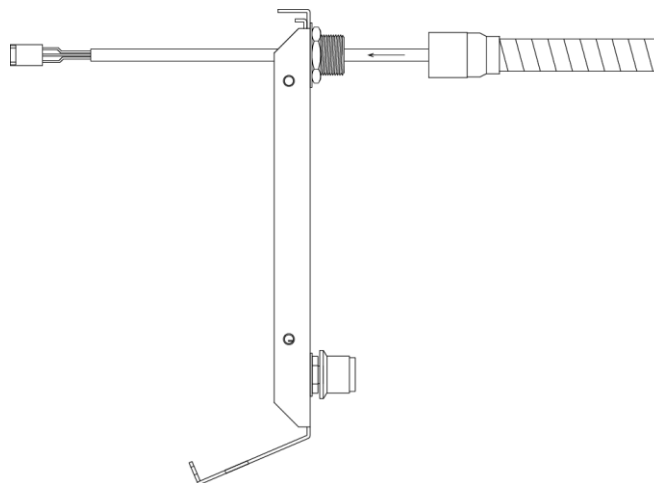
GOOSENECK ASSEMBLY INSTALLATION, GOOSENECK MOUNTING
